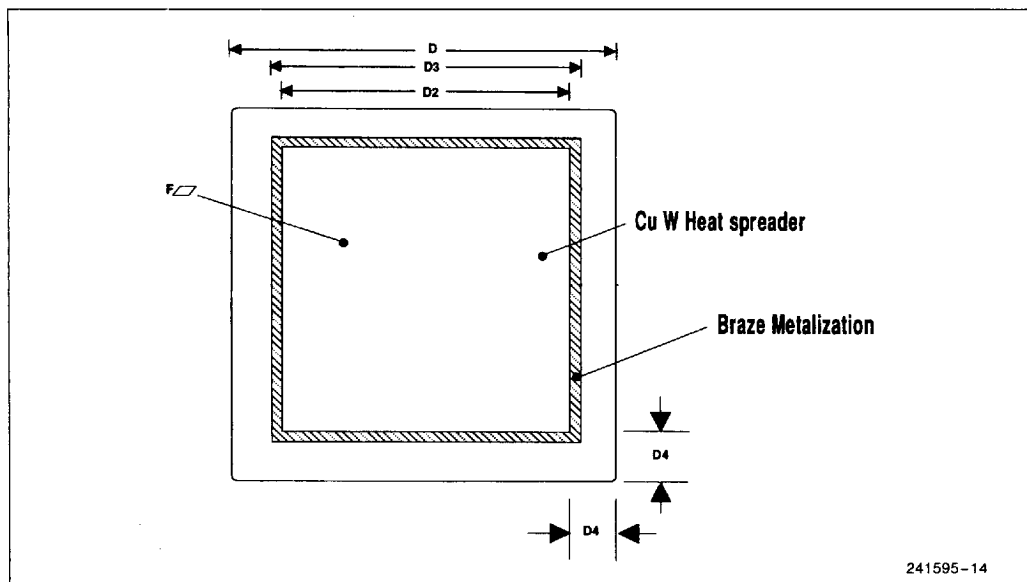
Pentium® Processor (510\60, 567\66) Package Dimensions
